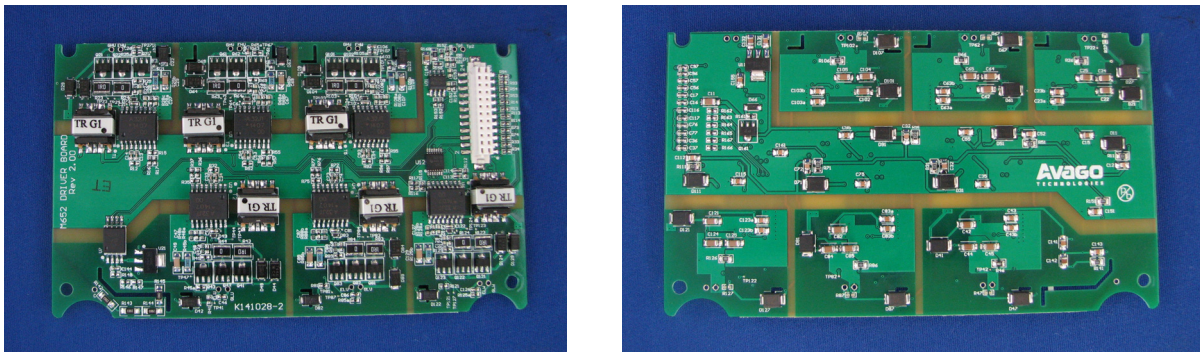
Gate drive circuit board manufactured by Avago Technologies for evaluation of 6MBI600VW-065
